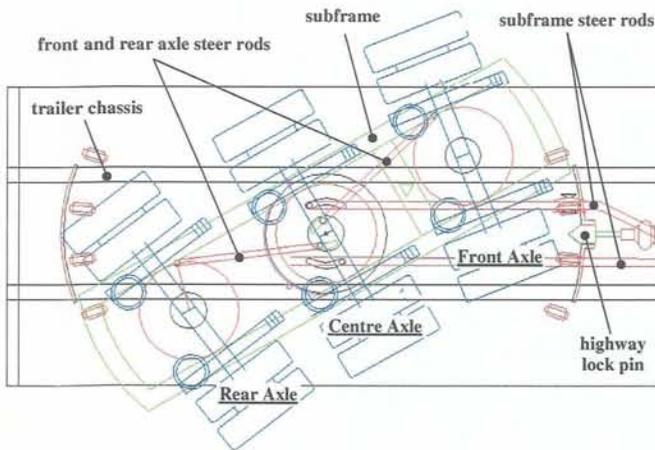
Schematic showing steer mechanisms between subframe and chassis, and front and rear axles and centre axle (adapted from drawings supplied by Gayat Pty Ltd).
